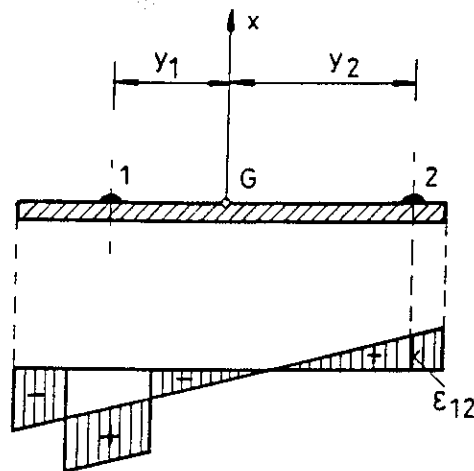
Initial strain in the place of the second weld due to the first weld
